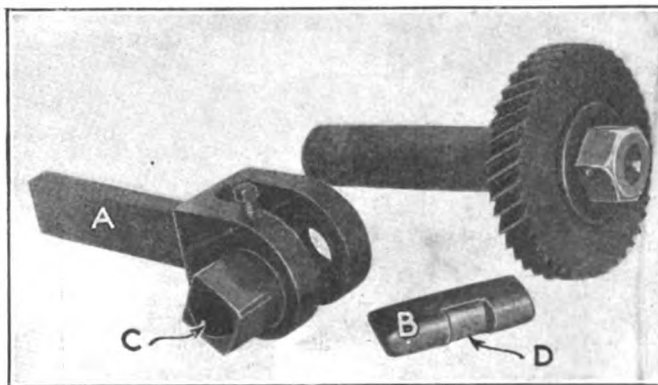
TOOLS FOR SLOTTING SPRING-HANGER PINS
